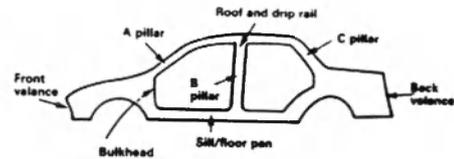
Car body construction under consideration for fabrication by laser welding
